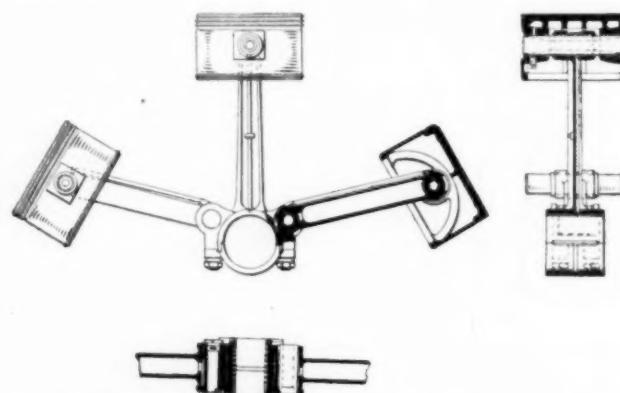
NAPIER LION AIRCRAFT ENGINE ASSEMBLY OF CONNECTING RODS AND PISTONS
